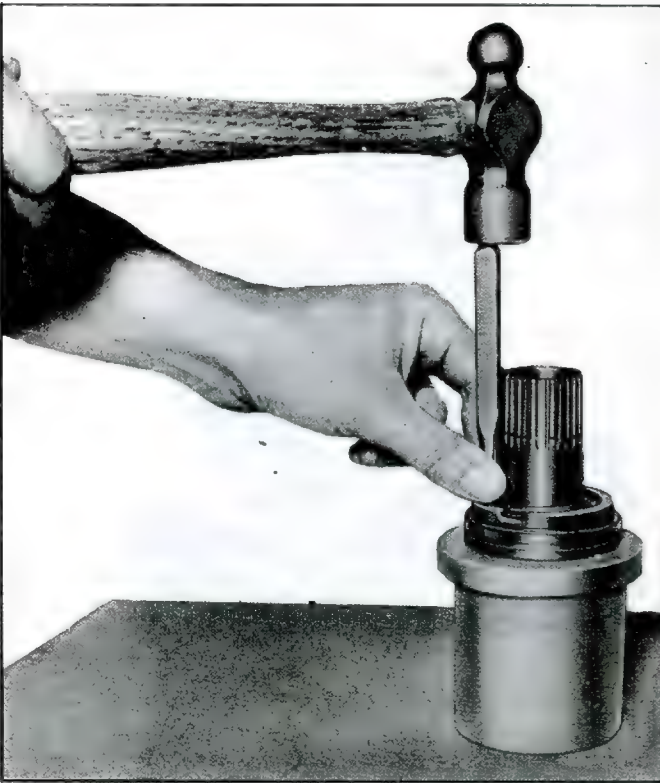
Removing Pinion Rear Oil Seal from Stator Shaft
